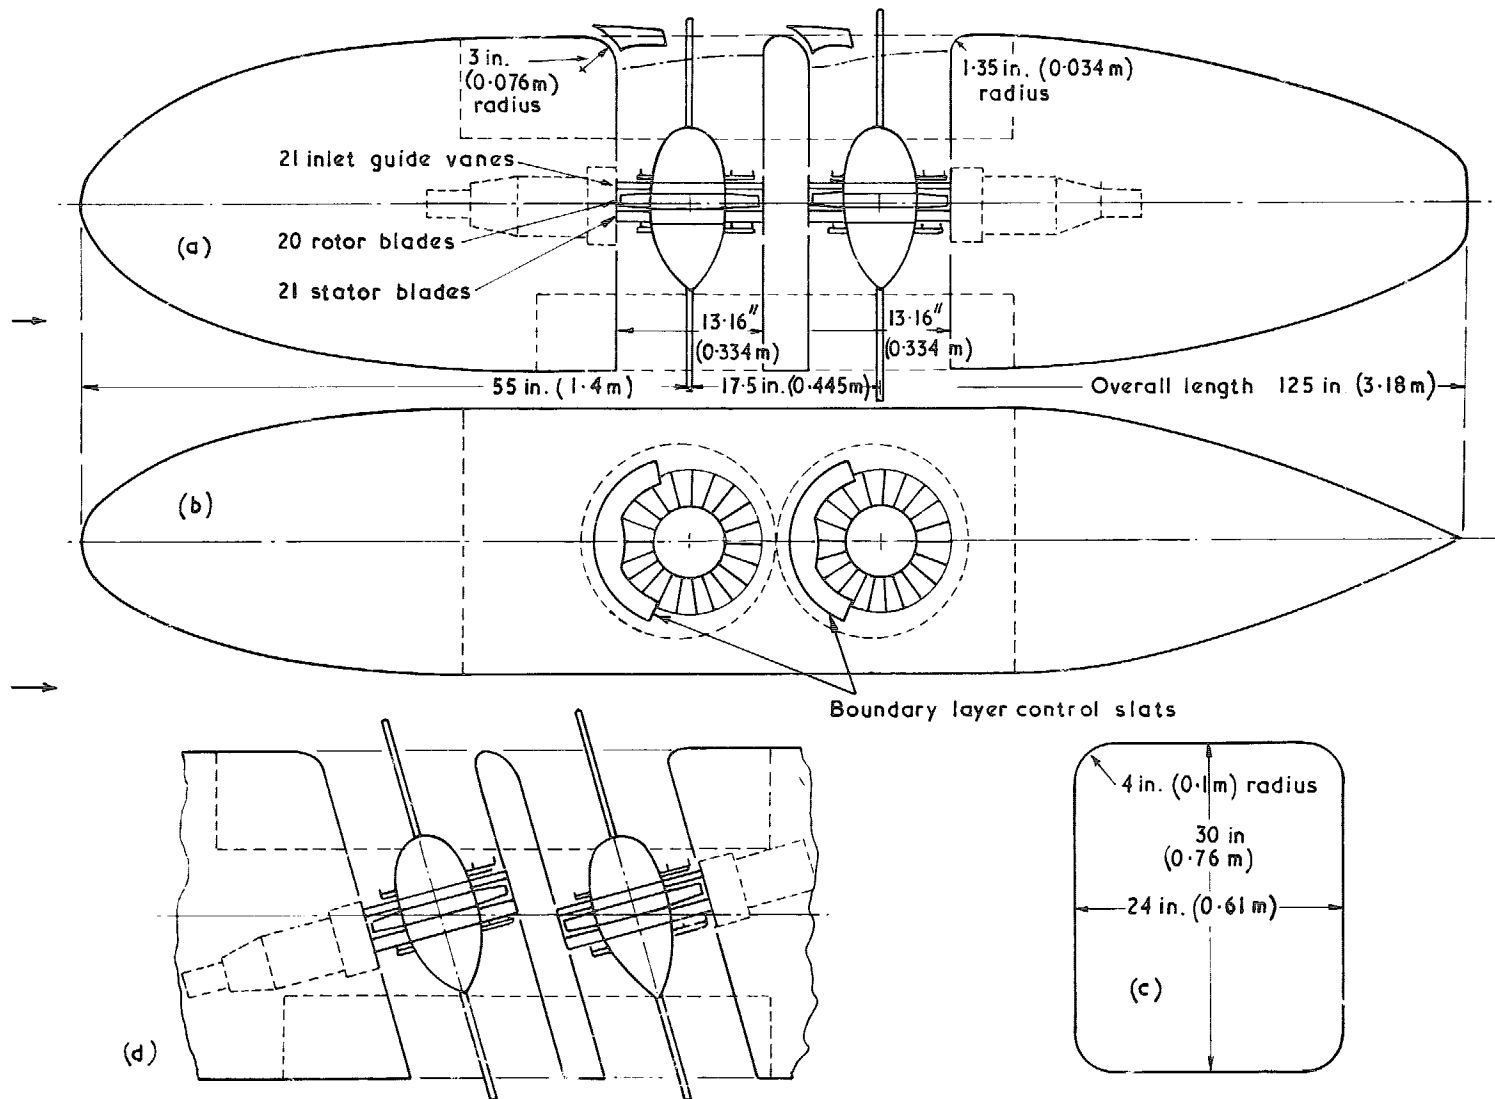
(a) Centreline section of elevation, and (b) plan view of twin fan nacelle (c) Maximum cross-section (d) Part centreline section of elevation with fans at 15 deg tilt.
